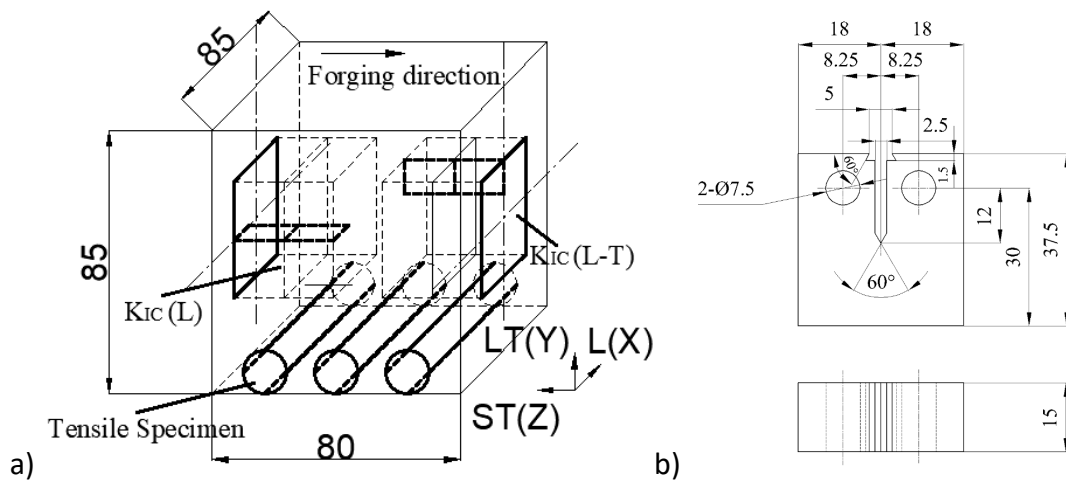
a) Fracture plane identification and samples' location; b) The size of fracture toughness Specimen for K_{IC} measurement (Dimension: mm).
